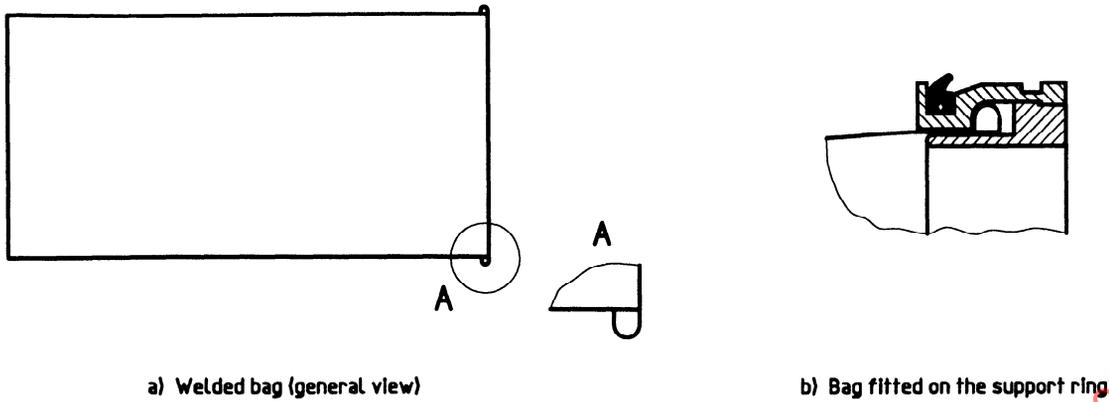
Welded bag ending in a bead for fitting on a type 2 support ring
